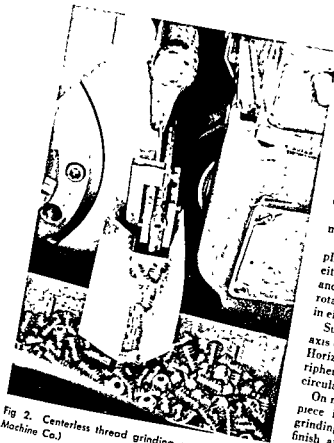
Centerless thread grinding operation. (Landis Machine Co.)
